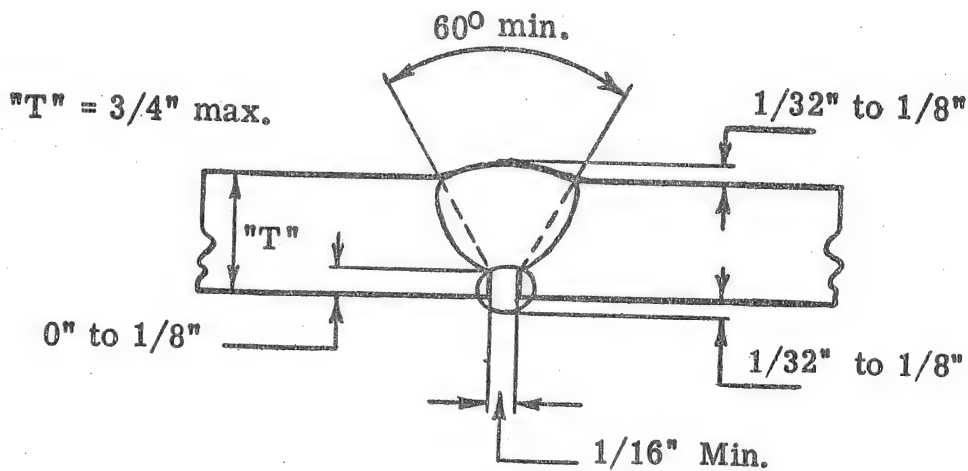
Single V-Groove Weld welded both sides.
